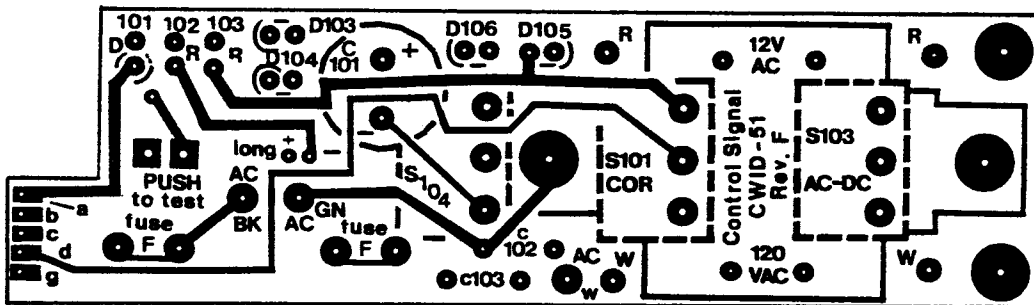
A. CWID-51 PCB (Power/Control) Top Layer
